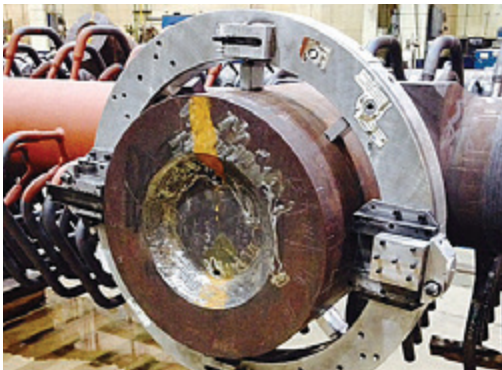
Welded in Place Plug for Pressure Testing
